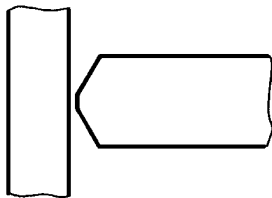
Double-bevel-T groove / T dubbel halv V-fog
